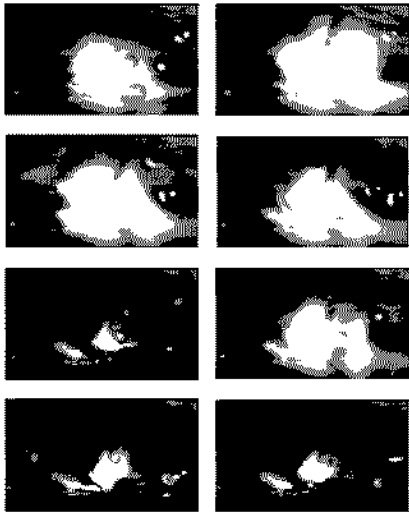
Spatter-formation during MIG-impulse-welding.
